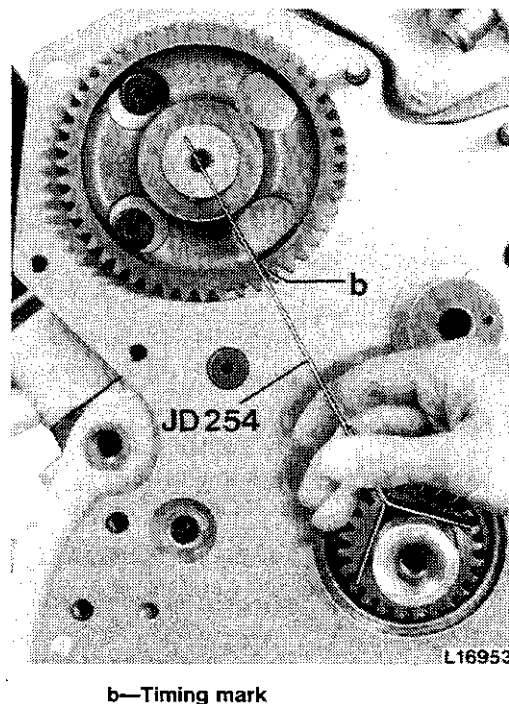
Timing Camshaft Gear by Means of Timing Tool No. JD 254
